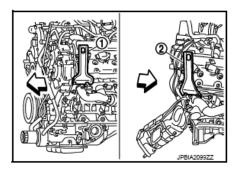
Identifying Engine Front And Rear Slinger Courtesy of NISSAN NORTH AMERICA, INC.
